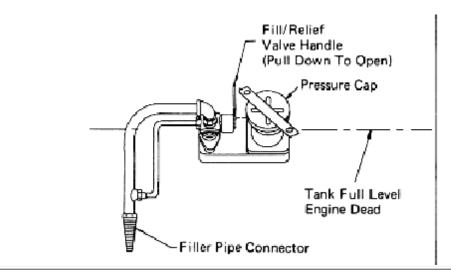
Cooling System Pressure Cap And Filler/Relief Arrangement
